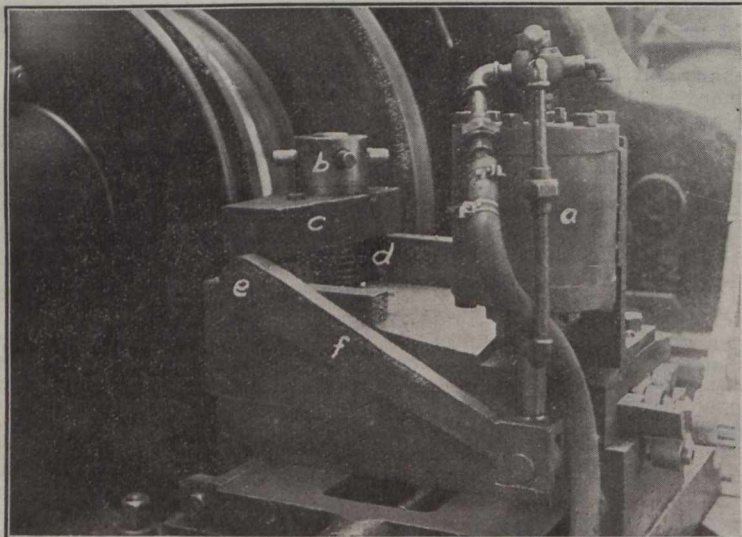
Air Clamp for Tools in Passenger Car Wheel Lathe.
